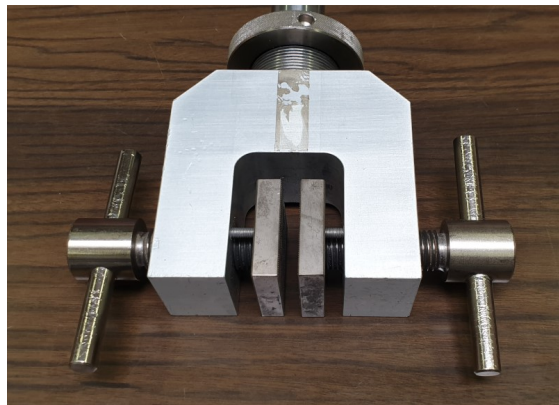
Gripping system of the universal testing machine MTS QTest10.
